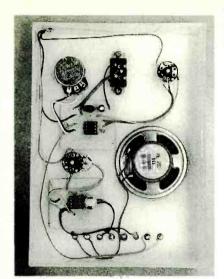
THE AUDIO MODULE is too simple to call for a PC board, so point-to-point wiring was used.
